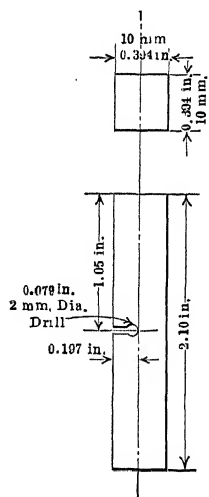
FORM AND DIMENSIONS OF TEST SPECIMENS.
